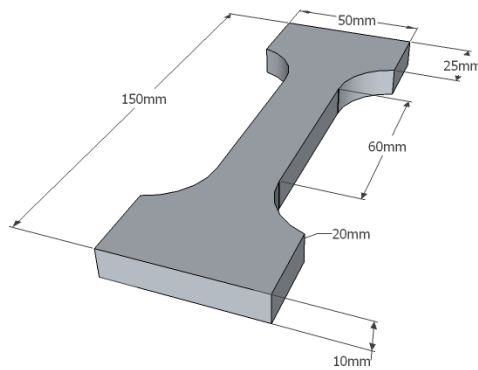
Dimensions of dog-bone samples after machining for tensile tests.
